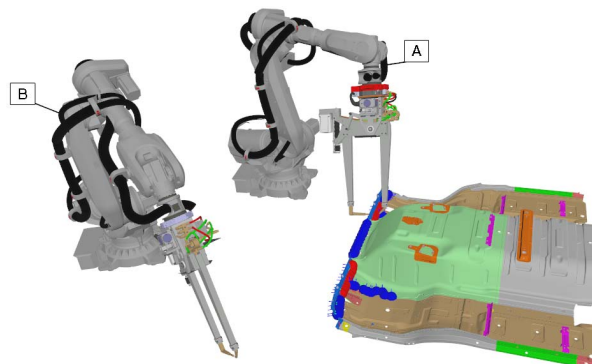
Two robots (A and B) with spot weld tools stationed at a workpiece with spot weld tasks (blue/red markers). Robot B is configured at its, so-called, *home position*; Robot A is in a configuration valid for a specific spot weld task on the workpiece. Both robots reach the blue tasks, but only the right reaches the red ones. For clarity, the surrounding geometries (e.g., floors) are left out. Instance courtesy of Scania AB.
